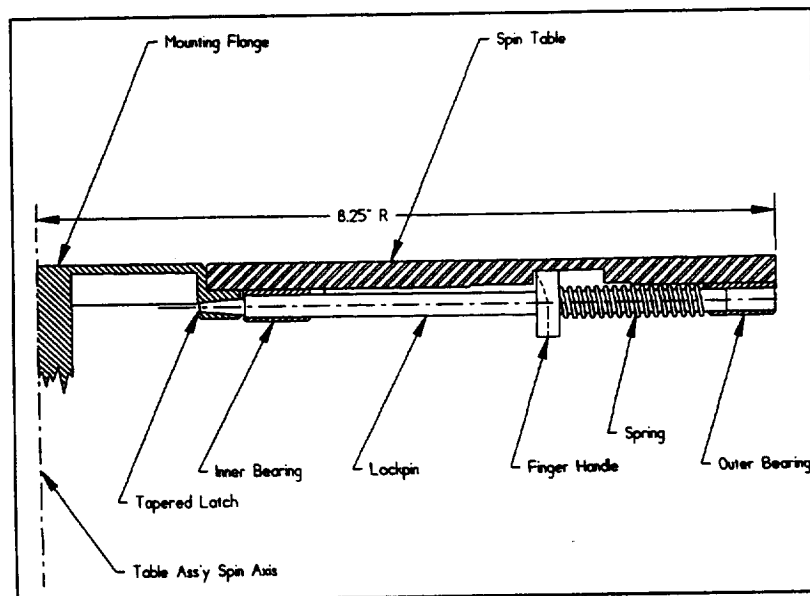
Spin Table Latch Pin, Cross-Section View.
